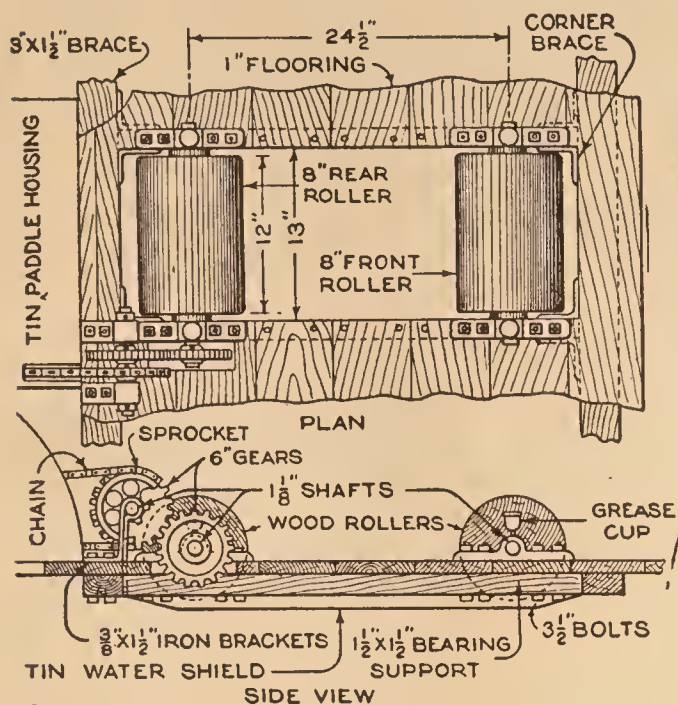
DETAIL OF ROLLERS, BEARINGS, AND GEARS
